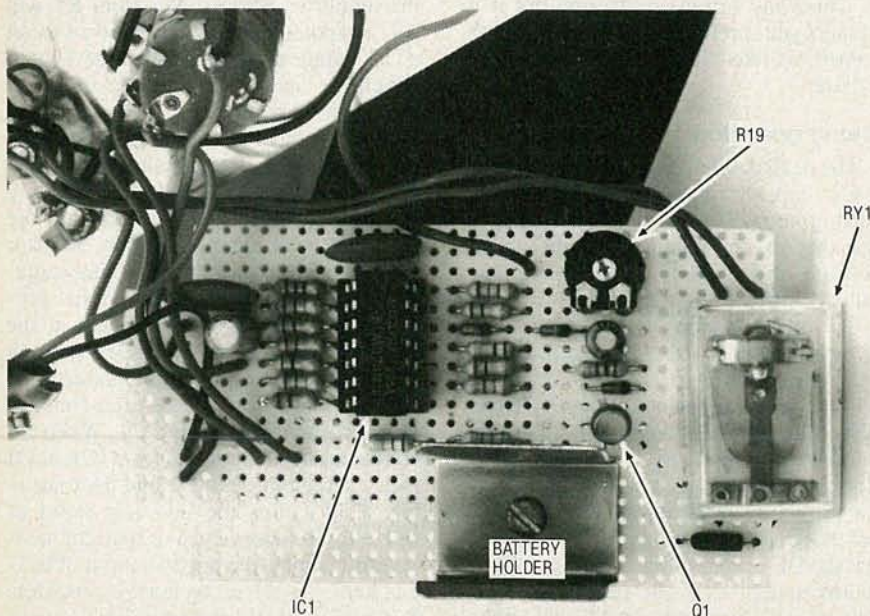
MOST OF THE CIRCUIT can be mounted on a small piece of perforated construction board.
